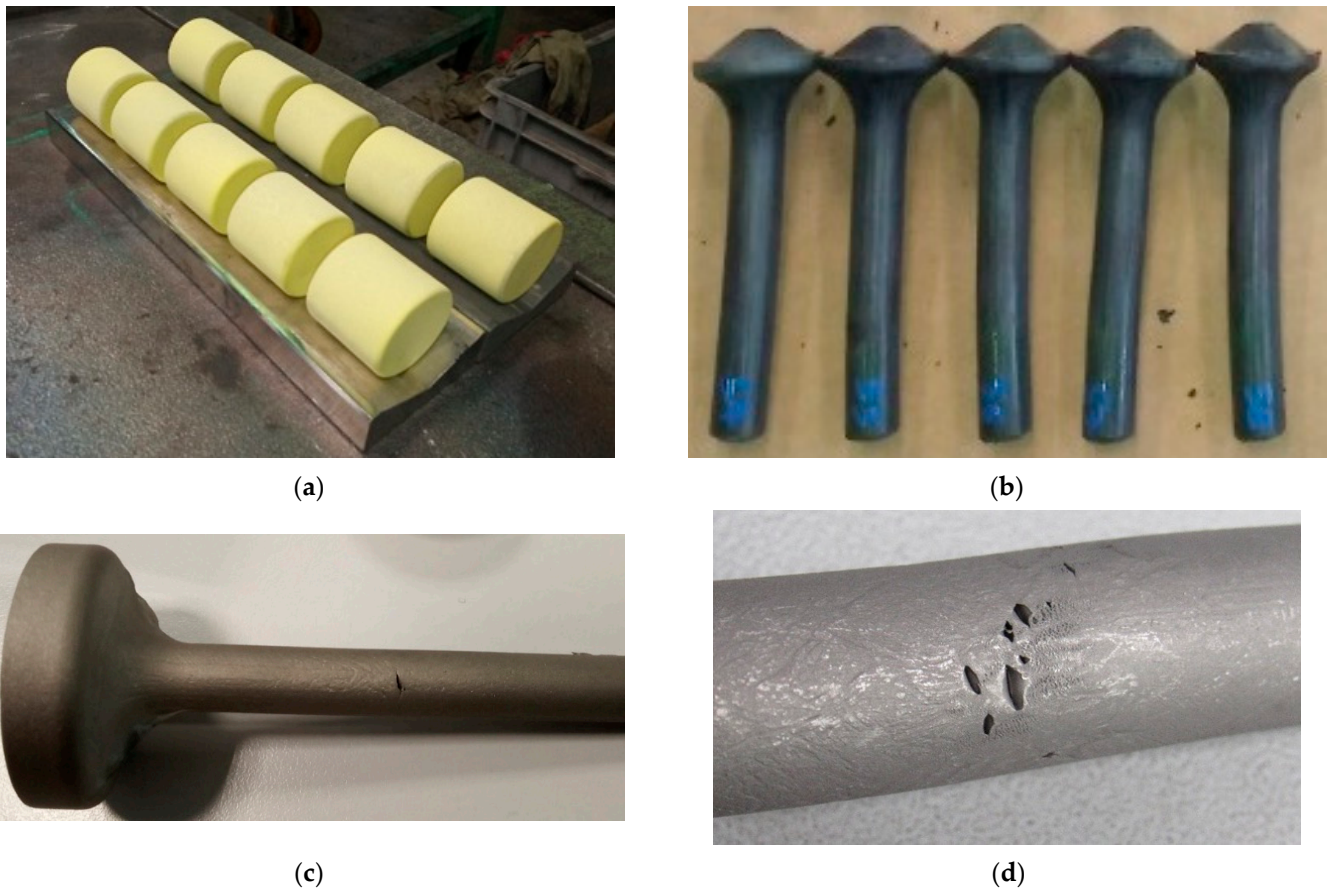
Set of glass-coated billets (a) ready for the extrusion test and (b) after the test. Surface crack formation after preliminary tests (c) and close up view (d) of the damaged zone.
